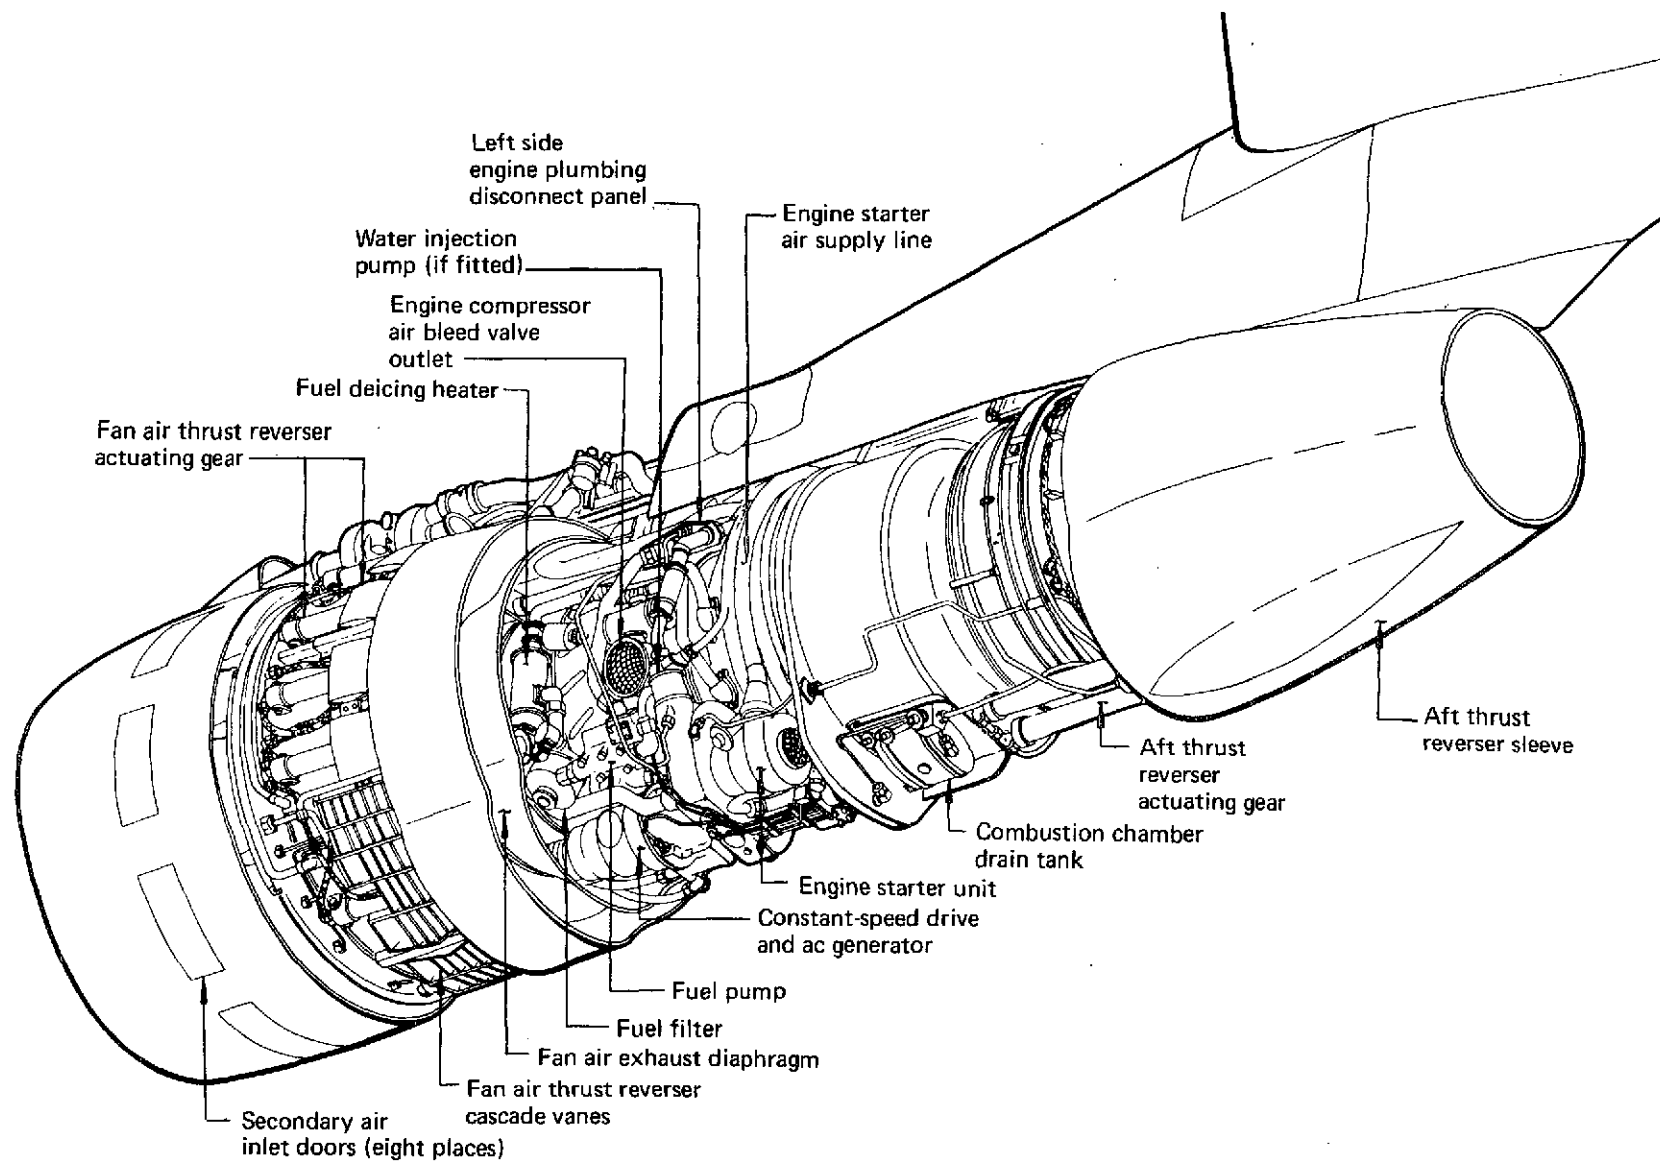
707/JT3D-3B ENGINE LOWER LEFT SIDE VIEW
